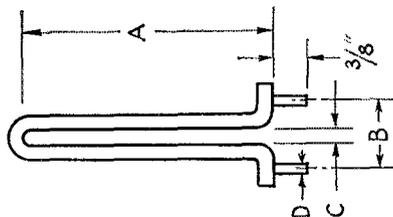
Dimensions of modified v.h.f. inductor for Heathkit and Millen grid-dip meters. See table.
